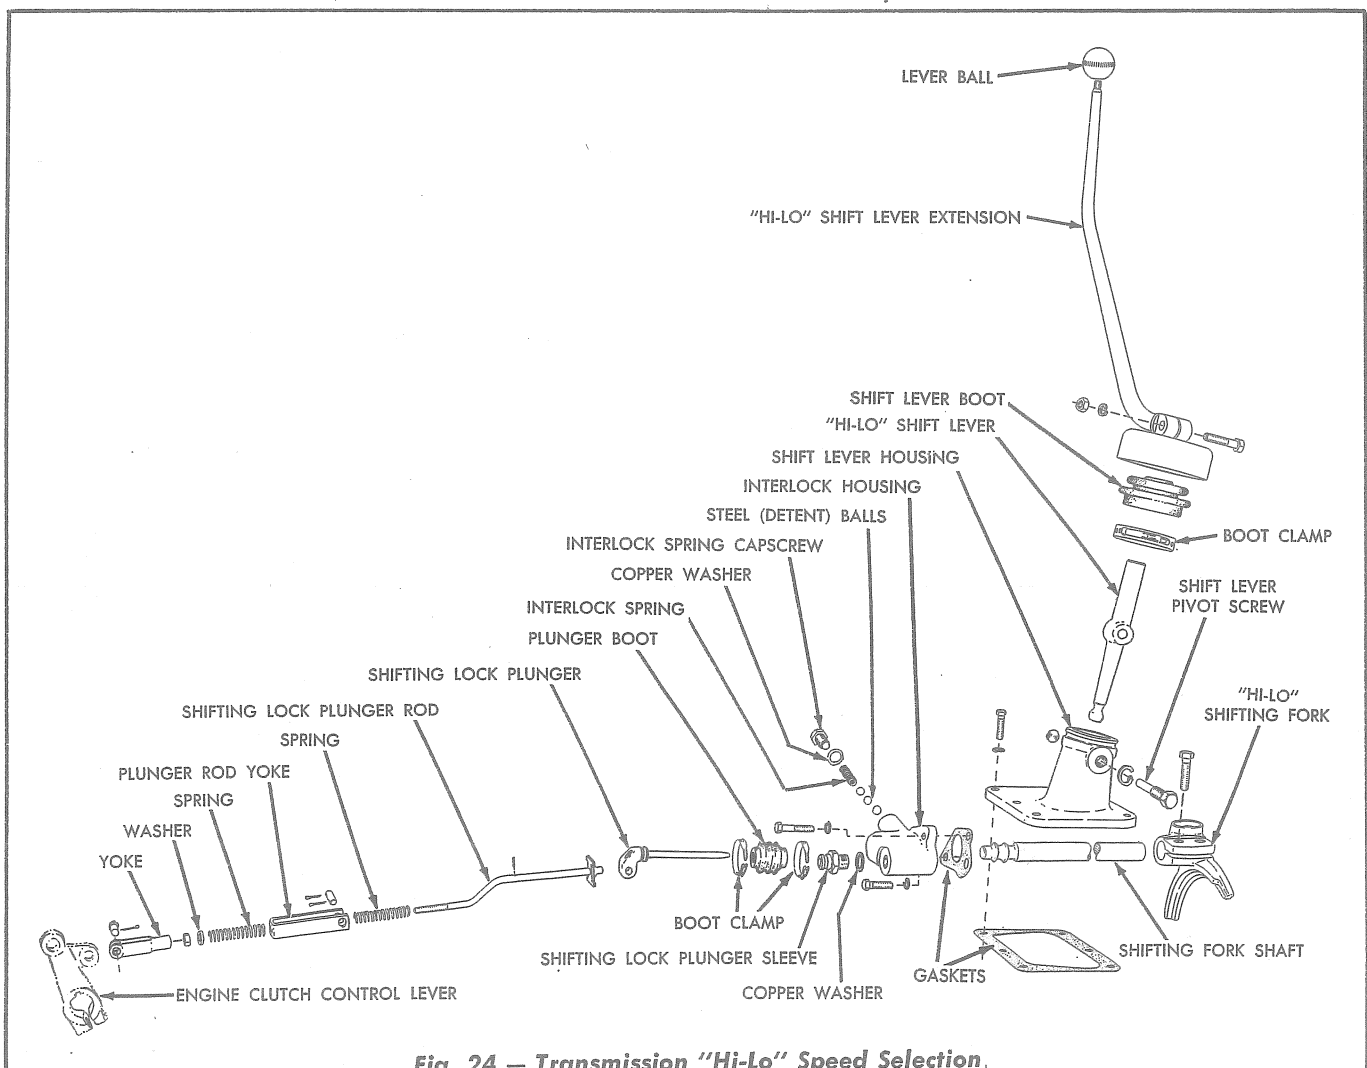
Transmission "Hi-Lo" Speed Selection Mechanism Details (Tractors Without Torque Converter)
